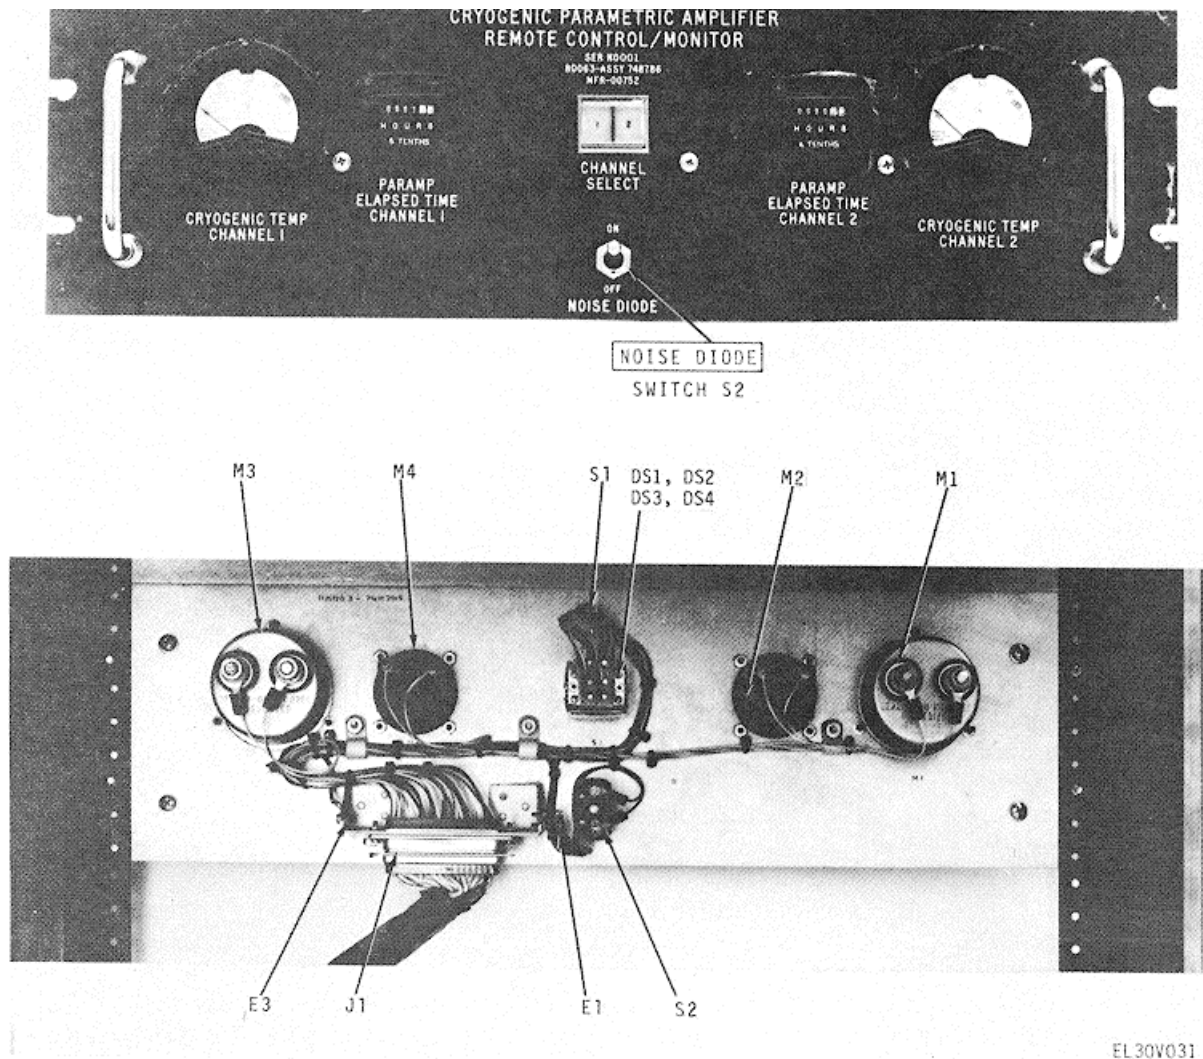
Remote Control/Monitor Assembly 3A1, Serial No. 001
